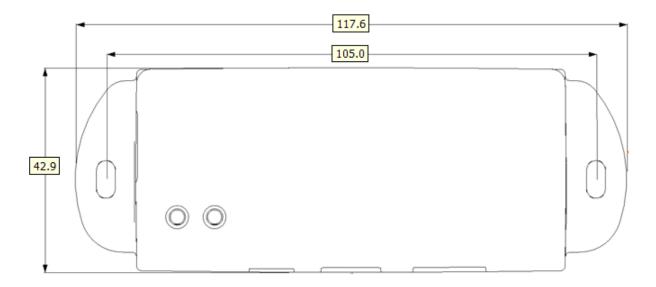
LDSBUS USB Adapter Dimension - Front View
